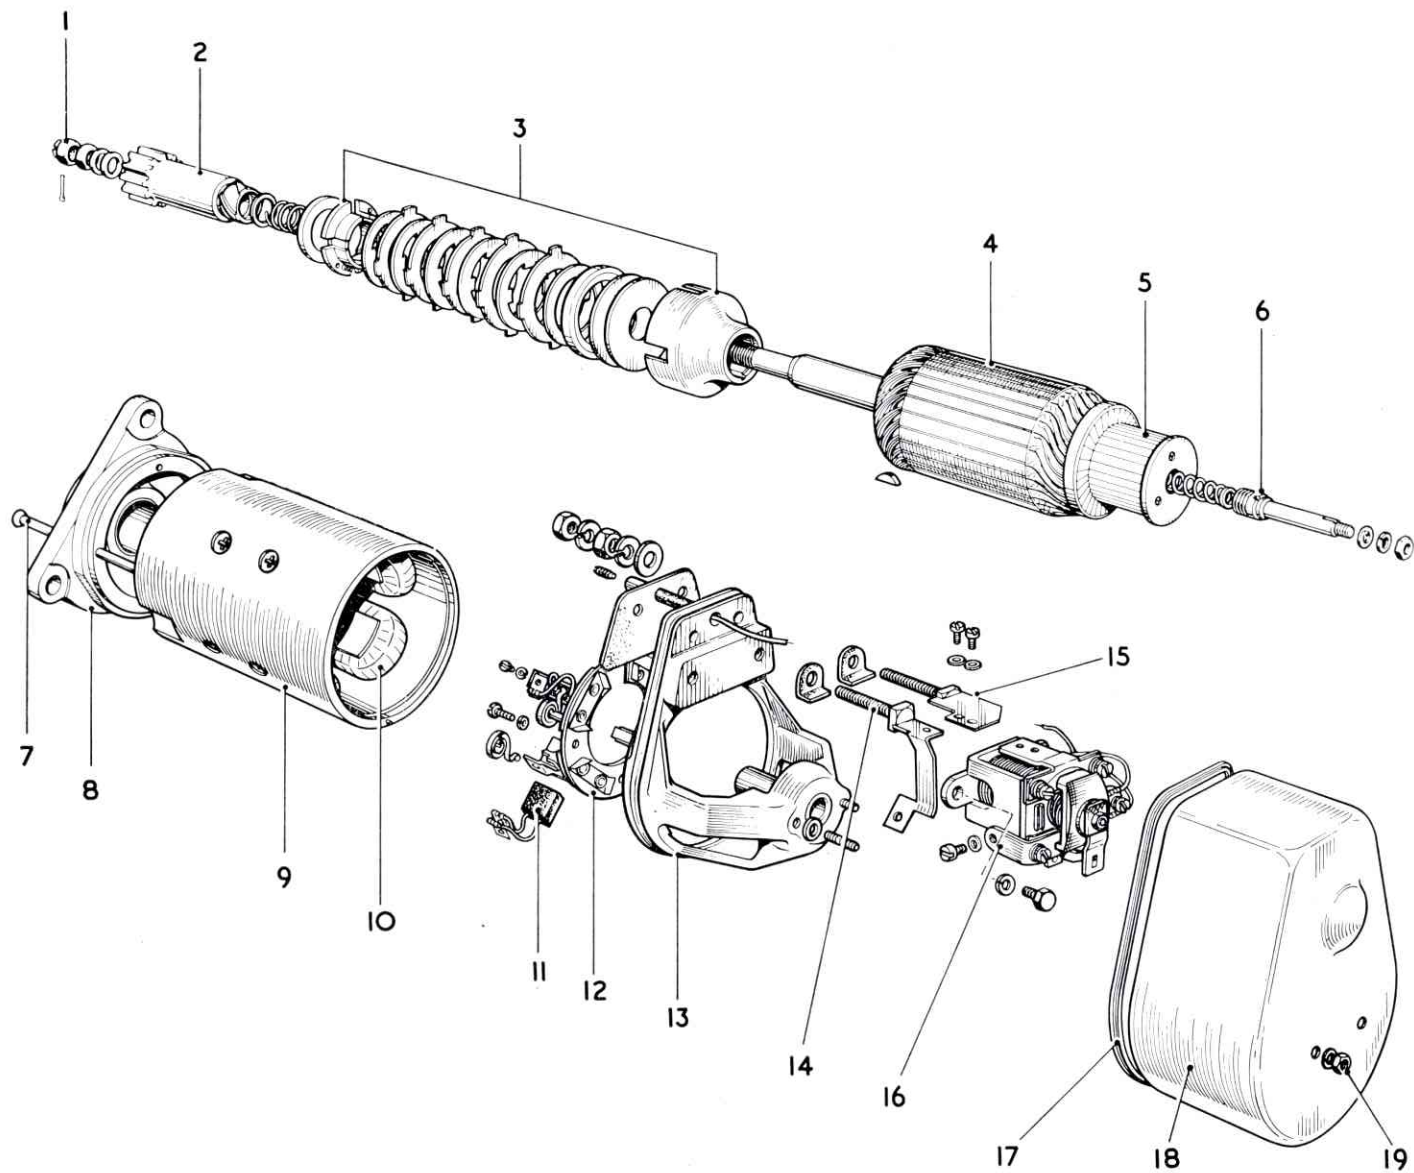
EXPLODED VIEW OF THE STARTER MOTOR
